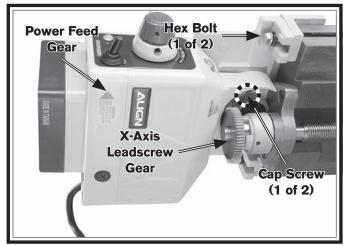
Left side of power feed bracket with attached power feed unit mounted to right side of bracket.
